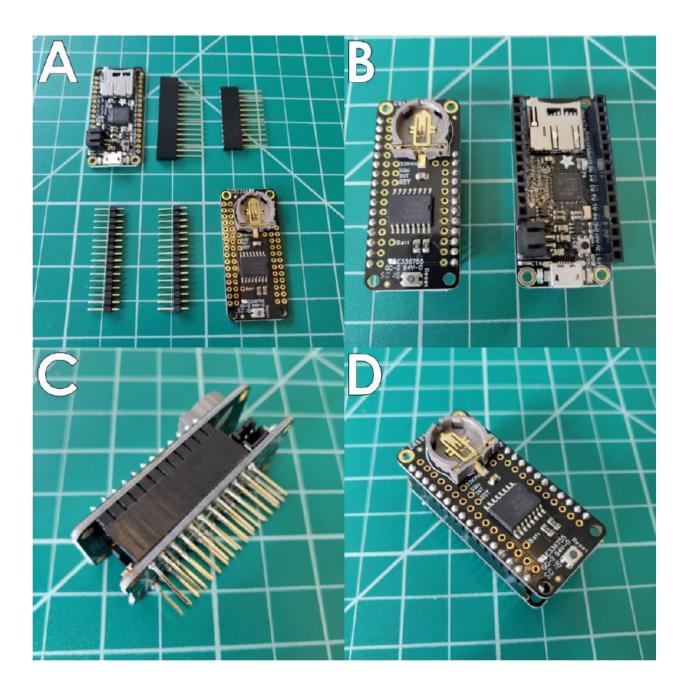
Connecting Adalogger and DS3231 using male and female header pins. A: Adalogger and DS3231 with associated headers. B: After soldering. C: Side view of connected components. D: Top view of connected components (Thaler, et al., n.d.).
